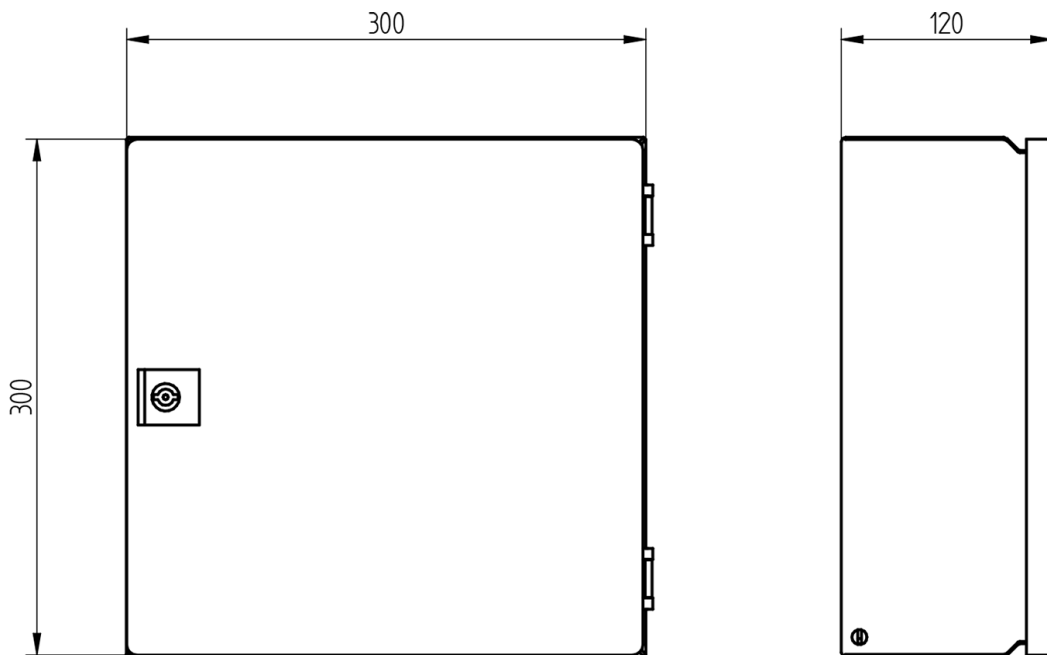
Dimensions of the external steel housing High energy igniter HEI500
